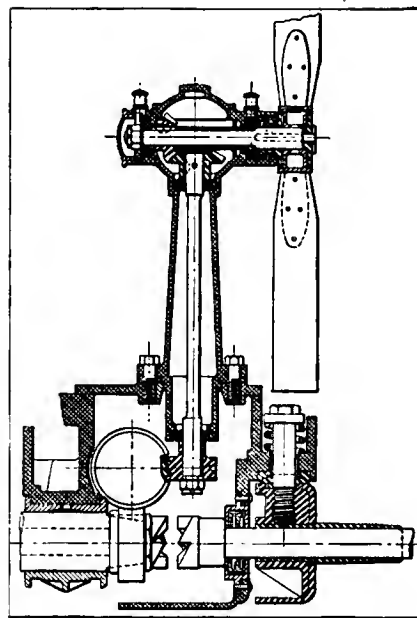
Section of front end of motor and fan, presenting method of driving and details of the starting crank
